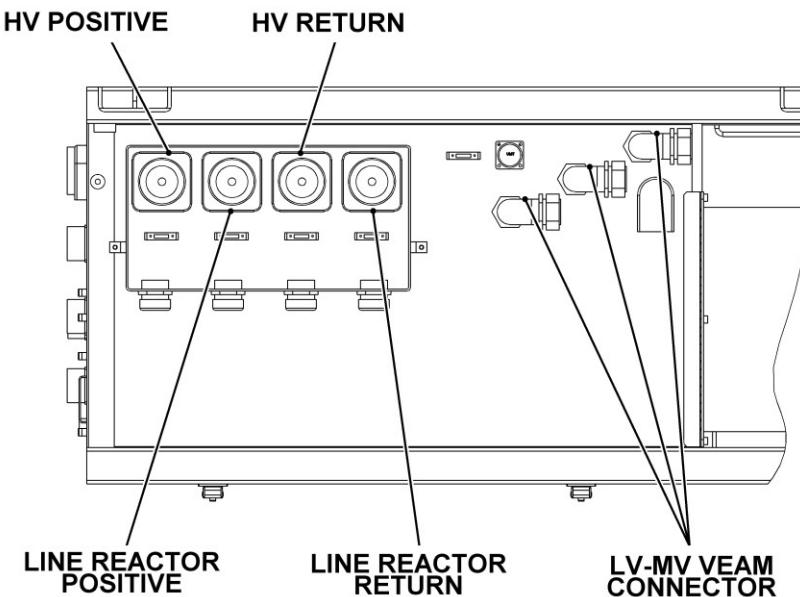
CONTROL MODULE REAR SIDE CONNECTORS
